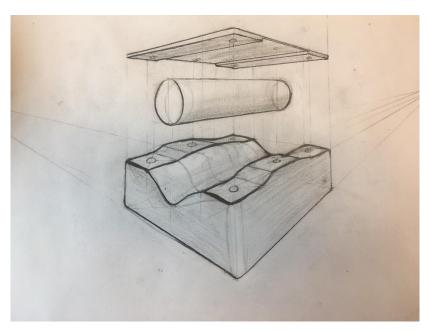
A sketch showing an exploded view of *Iteration II* with a pole.
